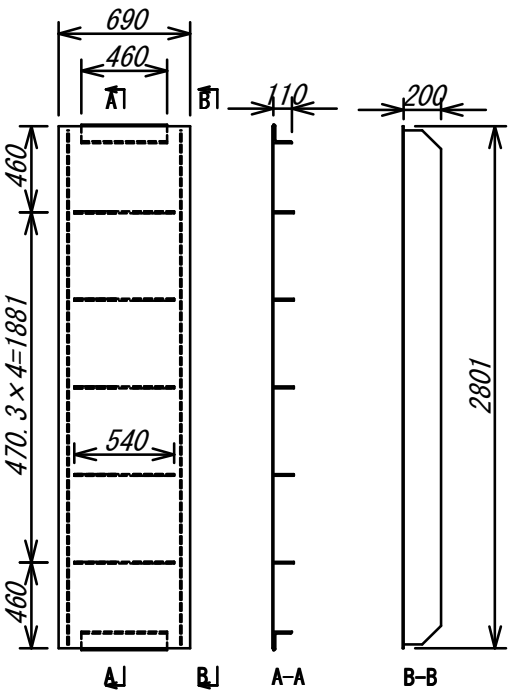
Geometry of Laser arc hybrid welded panel
